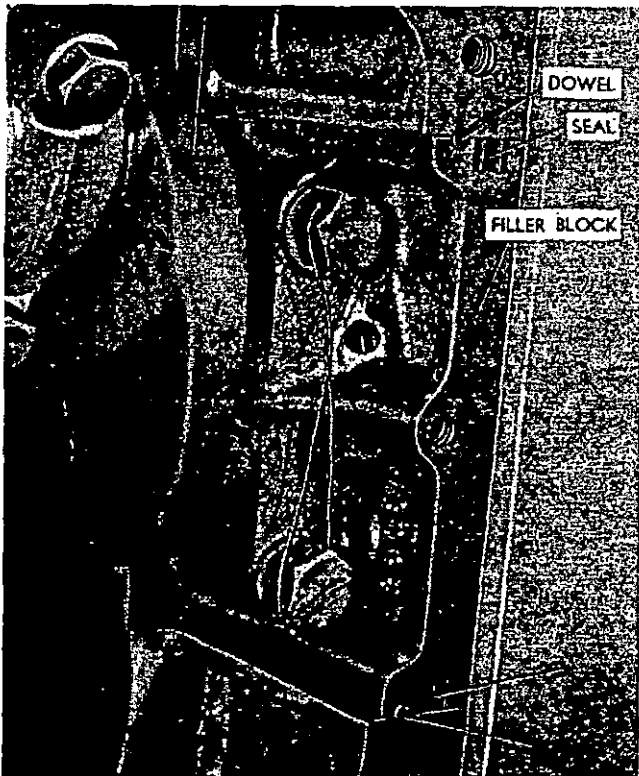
Rear Bearing Filler Block Showing Lock Wires in Place
